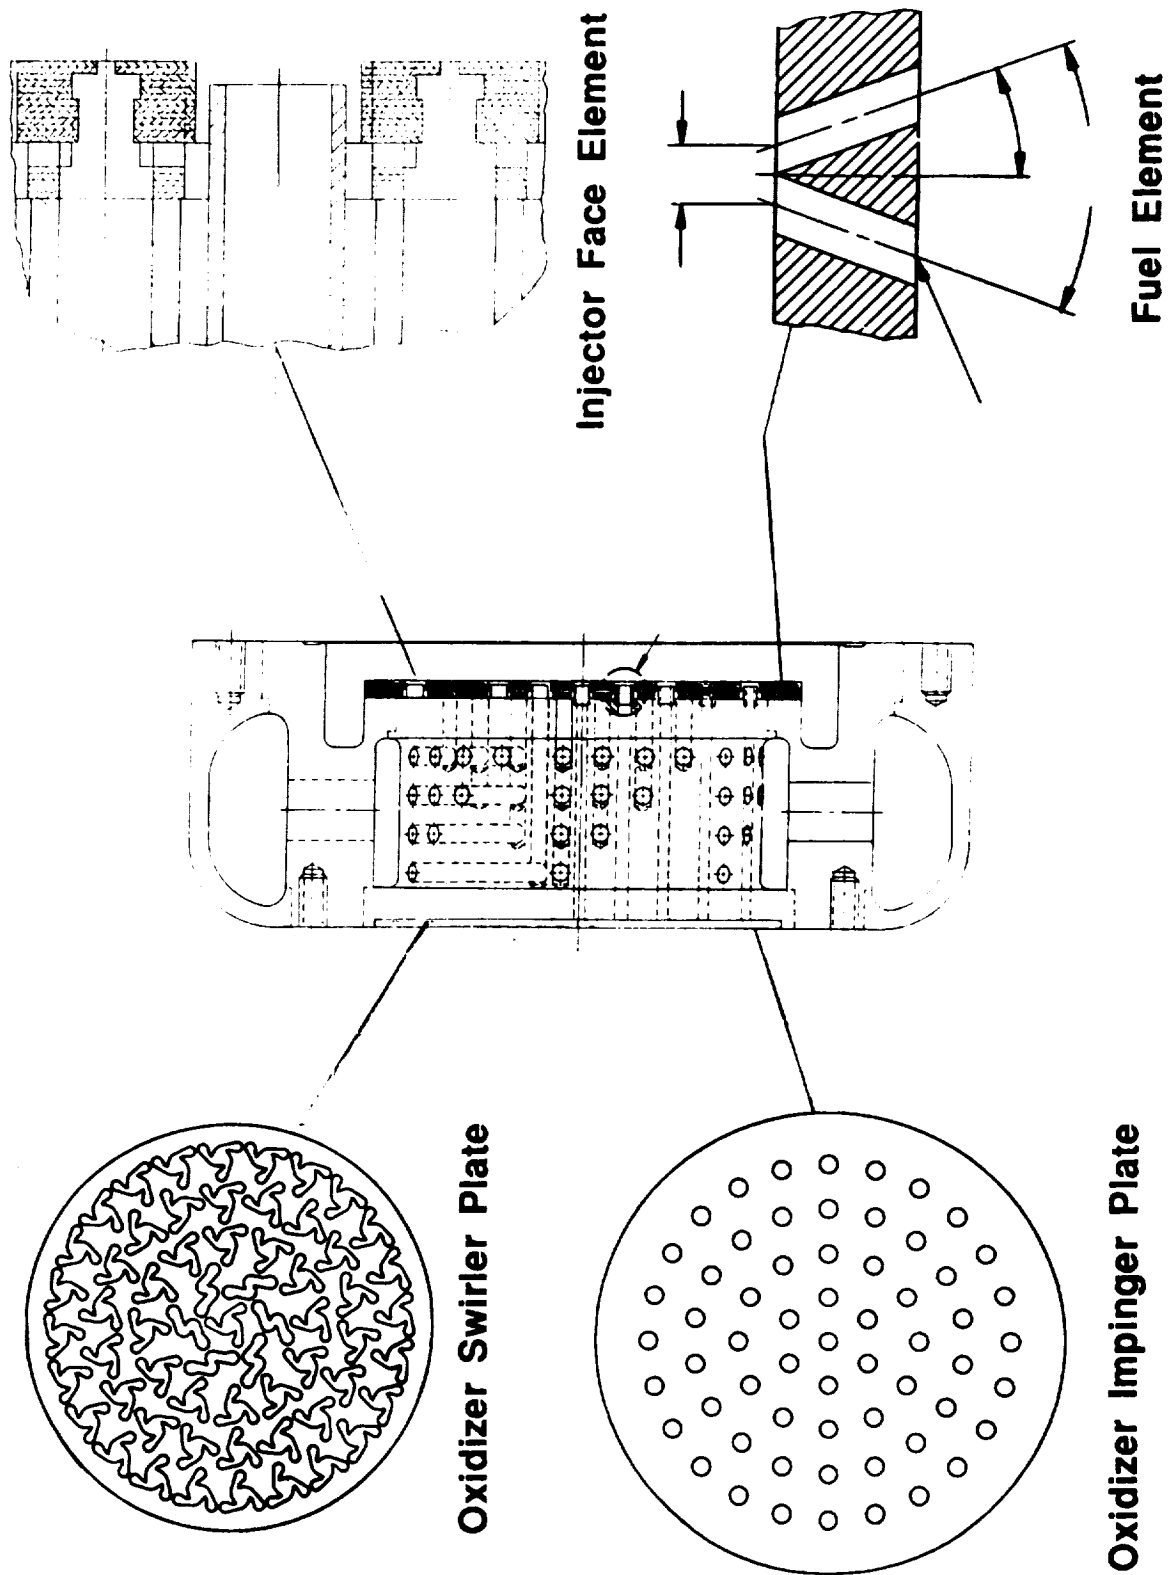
Our Cross-Drilled Workhorse Manifold Can Test Both Coax and Impinging Injectors
